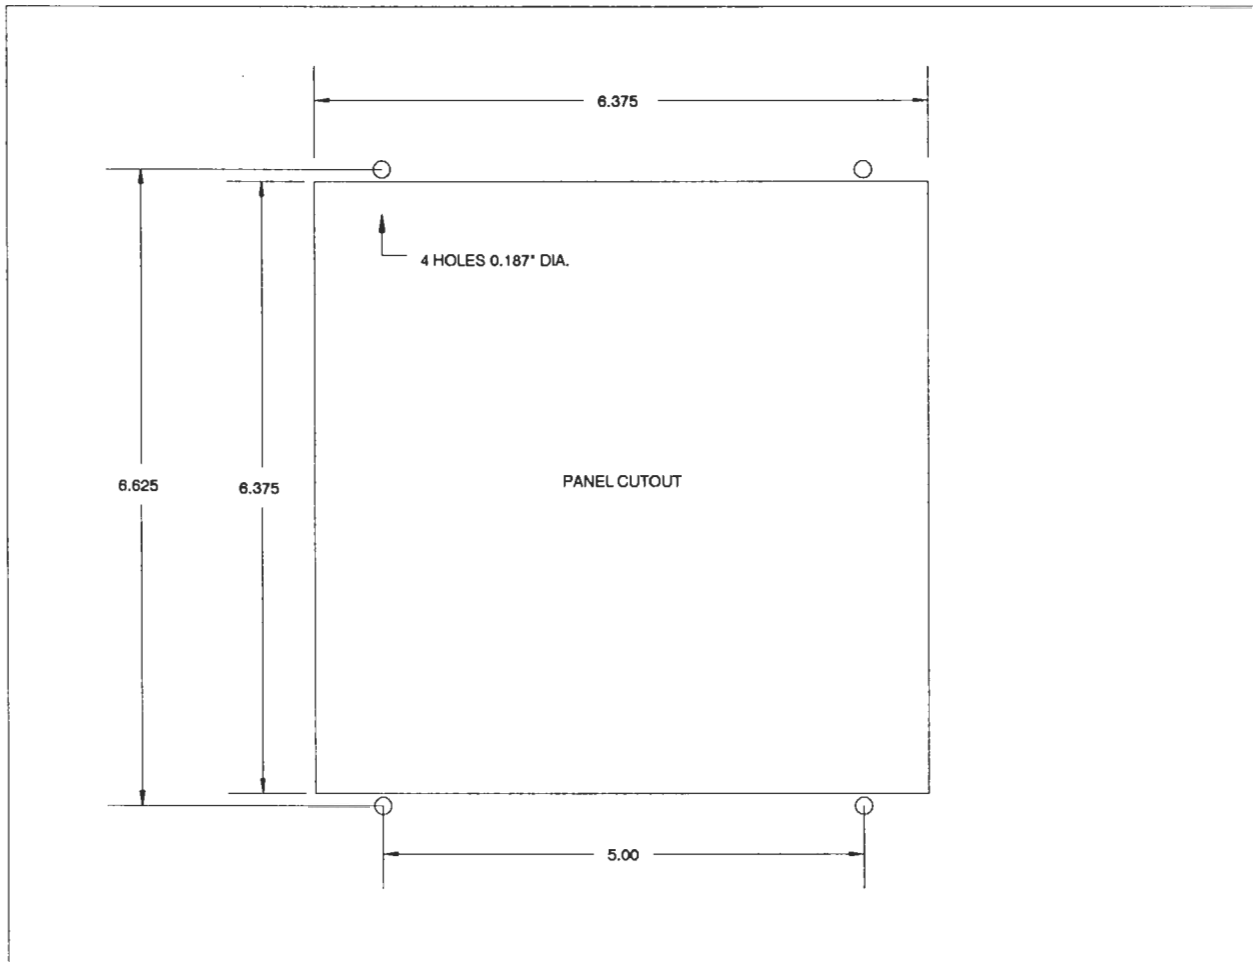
EC120 MOUNTING DIMENSIONS
